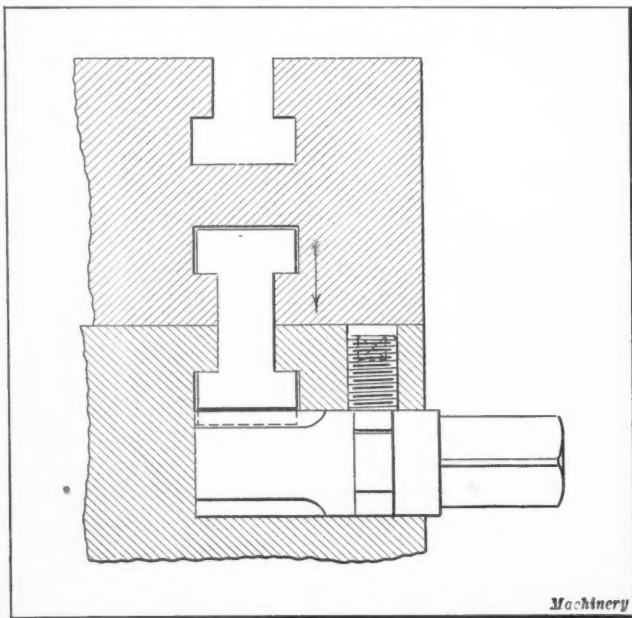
Arrangement employed on a Turntable for locating and clamping
